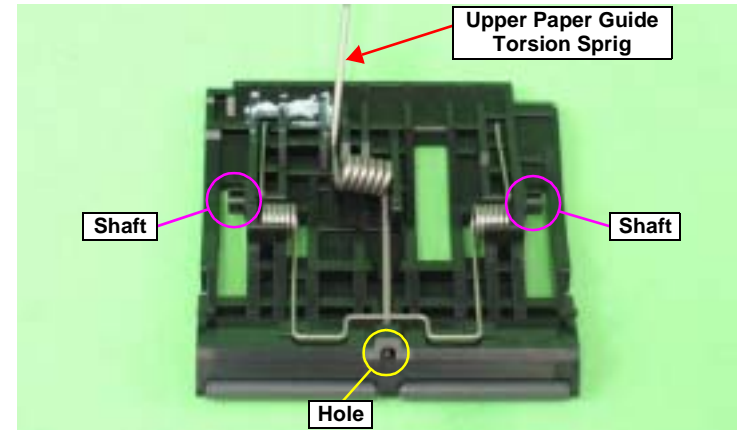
Reinstalling the Upper Paper Guide Torsion Spring
